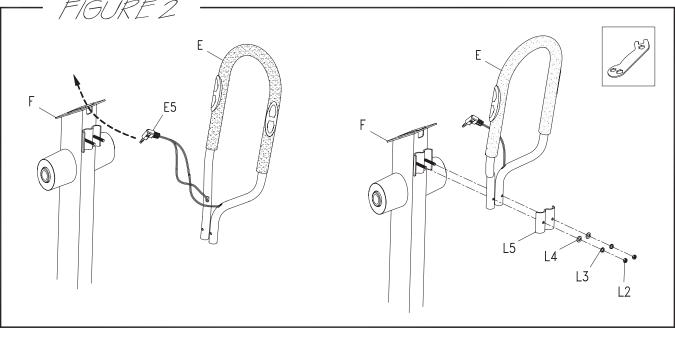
ASSEMBLY FOR SMALL HANDLE BAR
